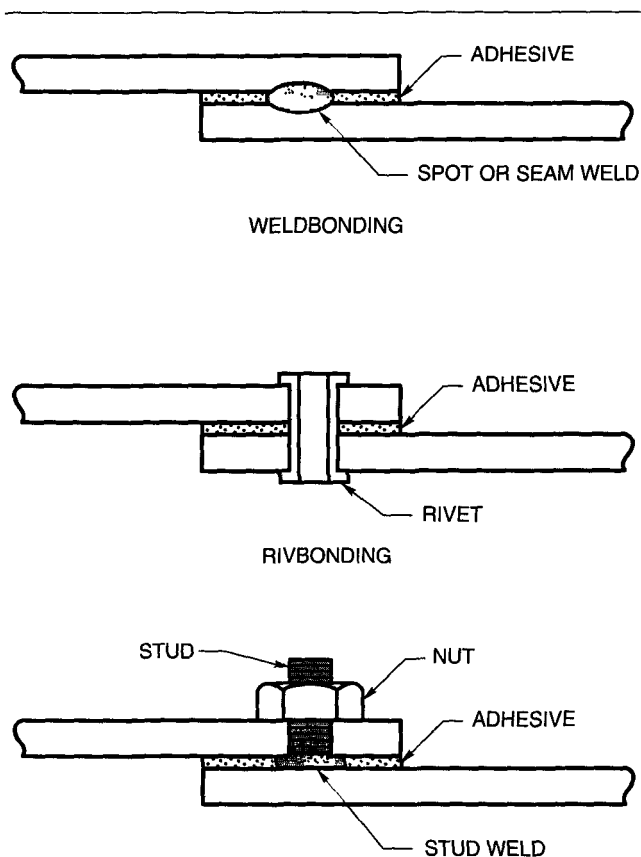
Adhesive Bonding in Combination with Resistance Welds and Mechanical Fasteners
